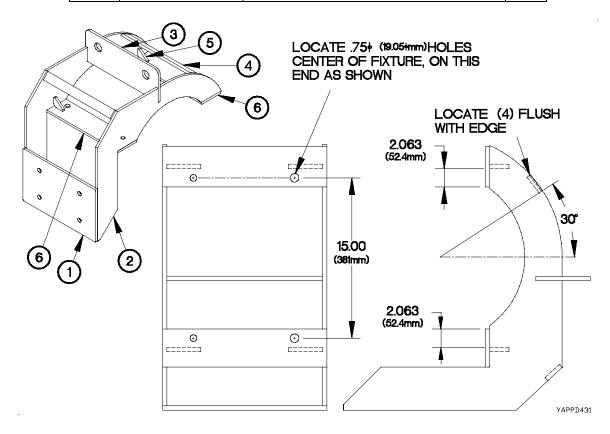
Transmission Lift and Mounting Bracket Assembly
